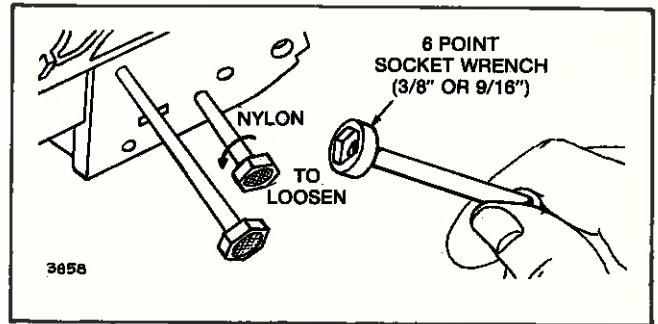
Replacing Nylon Fuel Pipes, Zinc Carburetor
